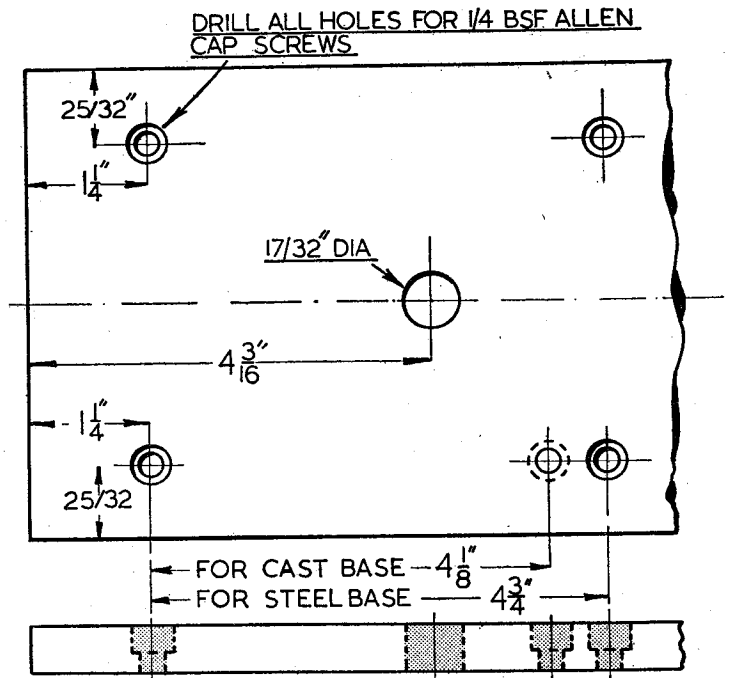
Drilling centres on the baseplate for the raising blocks and clamp bolt
